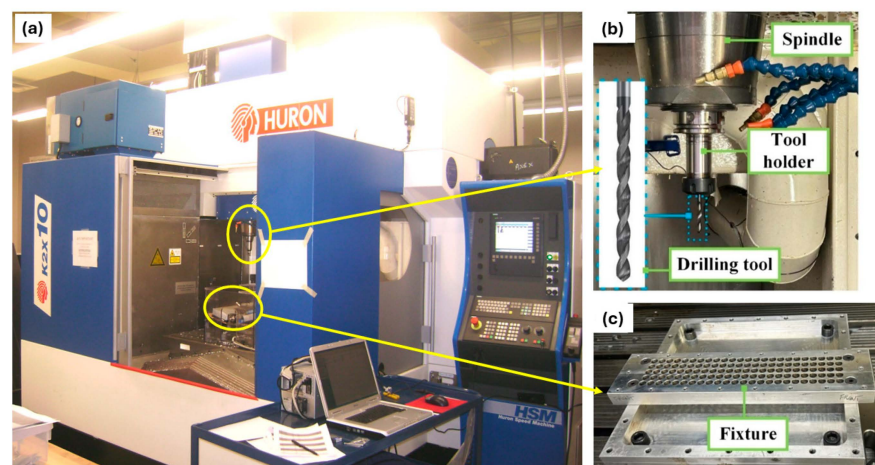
Experimental drilling setup: (a) Huron K2X10 three-axis CNC milling machine, (b) close-up of the CVD-coated drill bit in operation, (c) custom-designed workpiece fixture.
